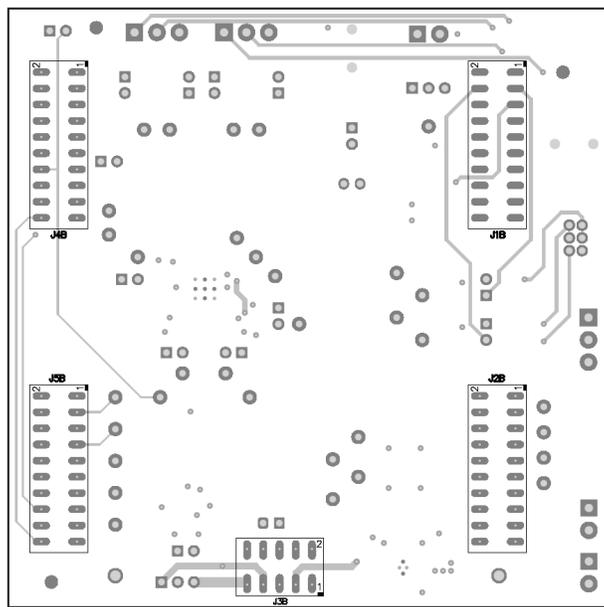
TLV320AIC3109EVM Bottom Assembly Layer
